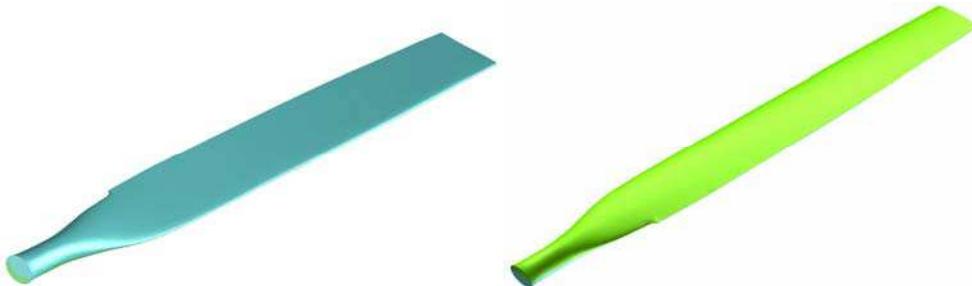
The scanned image of the Hoverhawk Warp Drive propeller blade produced by IOT Design and Fabrication. Left: face-up view (suction side up) and right: back-up view (pressure side up).
